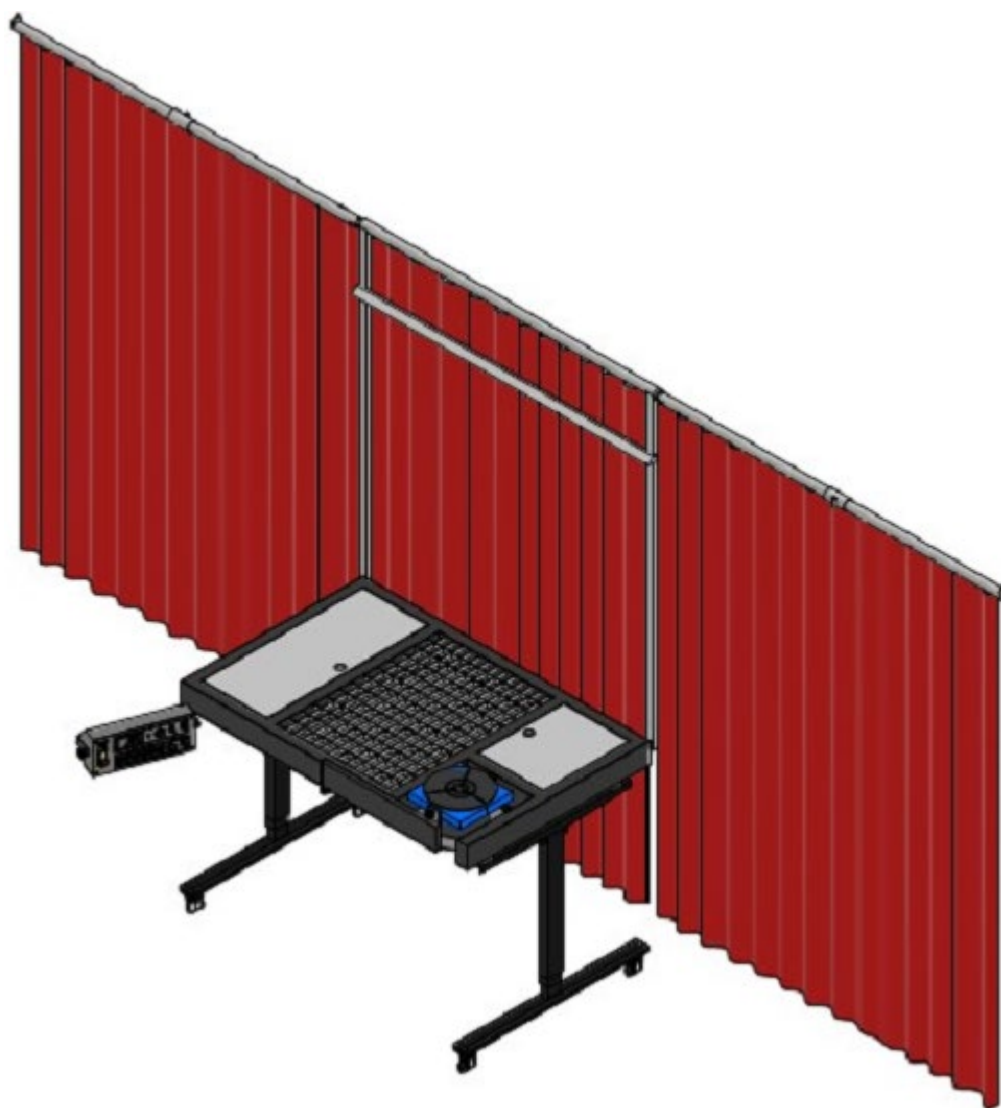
An overview drawing of the welding table designed in Fusion 360
